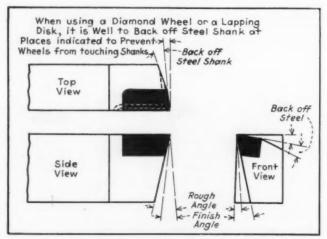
WHEN USING A DIAMOND WHEEL OR A LAPPING DISK, GRIND STEEL SHANK AT PLACES INDICATED TO PREVENT WHEEL OR DISK FROM TOUCHING SHANK STEEL
